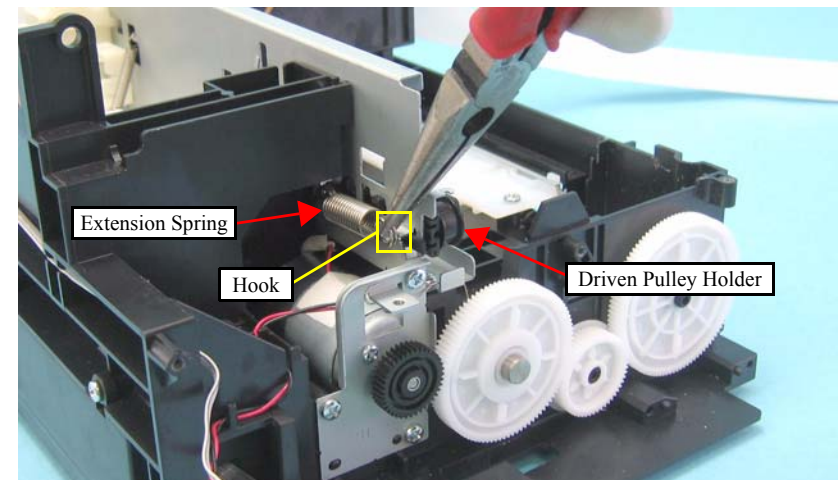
Removing the Extension Spring and Driven Pulley Holder
